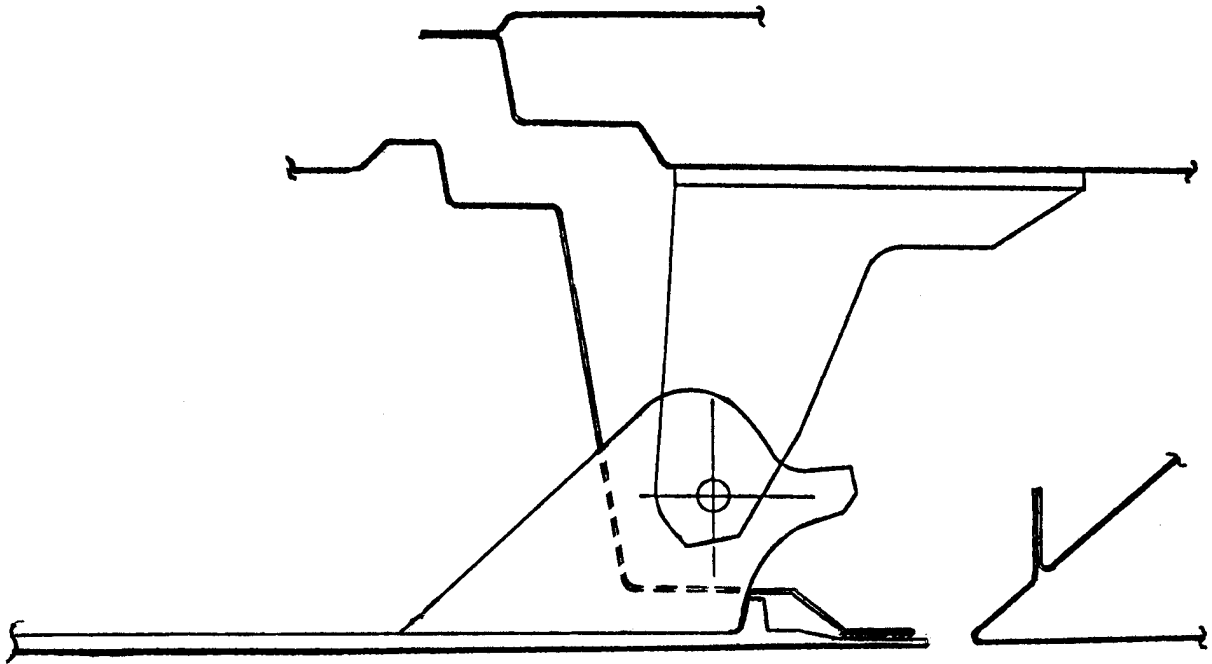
PROPOSED MODIFICATION TO THE COMPOSITE DESIGN WHICH ELIMINATES DOOR-TO-HINGE ADJUSTMENTS.
